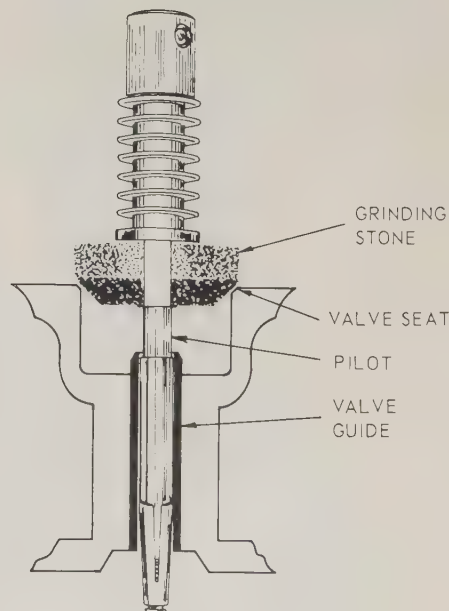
Pilot on which the grinding stone rotates. The pilot keeps the stone concentric with the valve seat. (Black and Decker Manufacturing Company)
